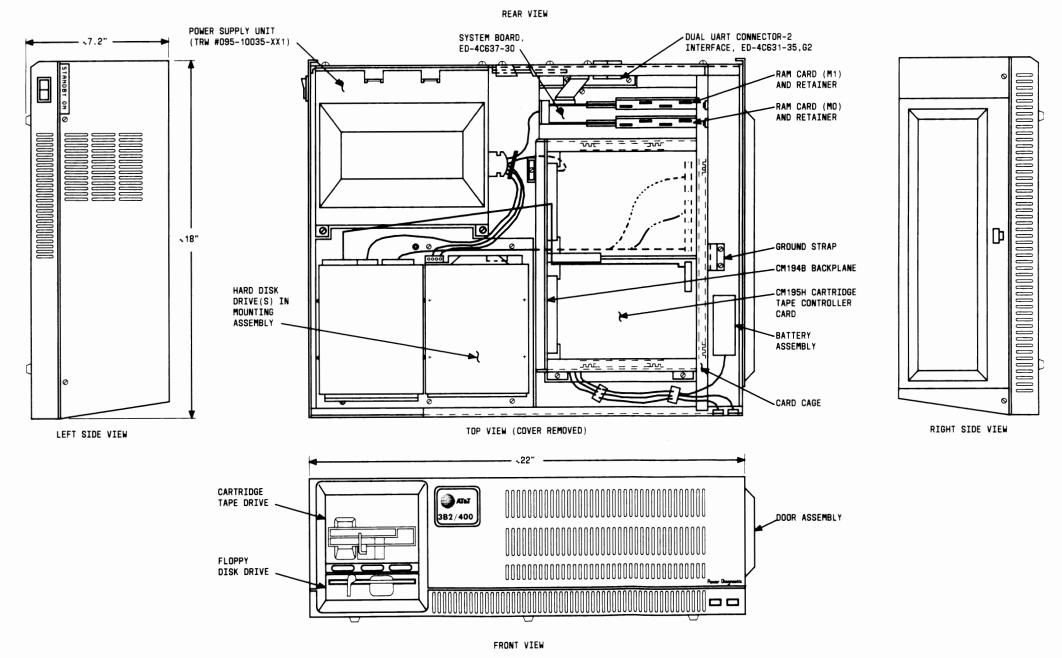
Domestic 3B2/400 Computer Cabinet Assembly Drawing (ED-4C631-30)
